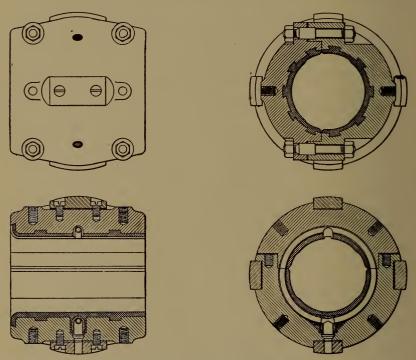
Bearings of Westinghouse-Parsons Turbine
